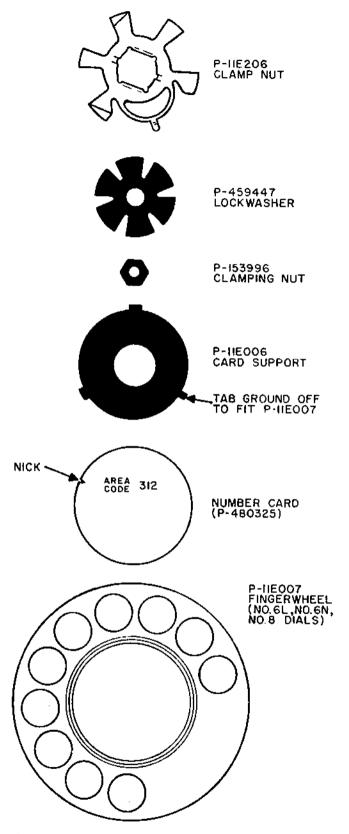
WECo Acrylic or Polycarbonate Fingerwheel Assembly with Integrally-Molded Window.
